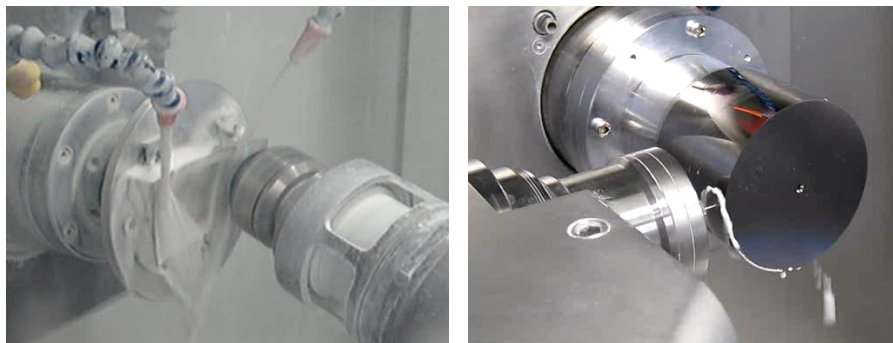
Examples of Bonnet (left) and Fluid Jet (right) polishing operations on the Zeeko 7-Axis CNC machine.
